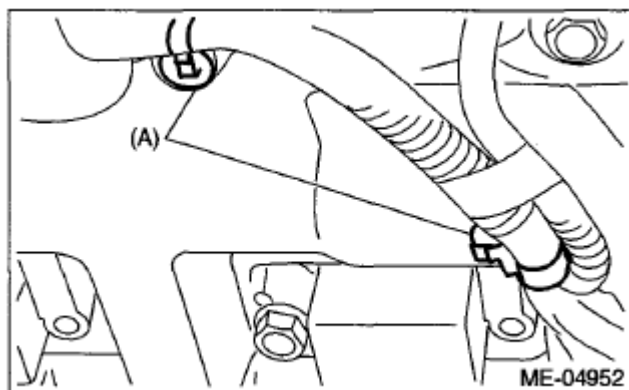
Identifying Engine Harness To Rocker Cover RH With Clips
